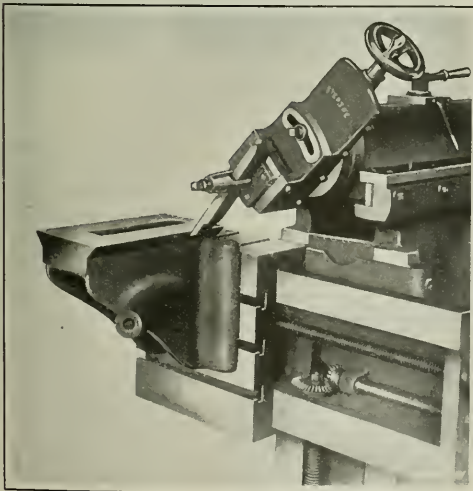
Use of Shaper for planing the Dovetailed Saddle Bearing of a Hand Milling Machine Knee
